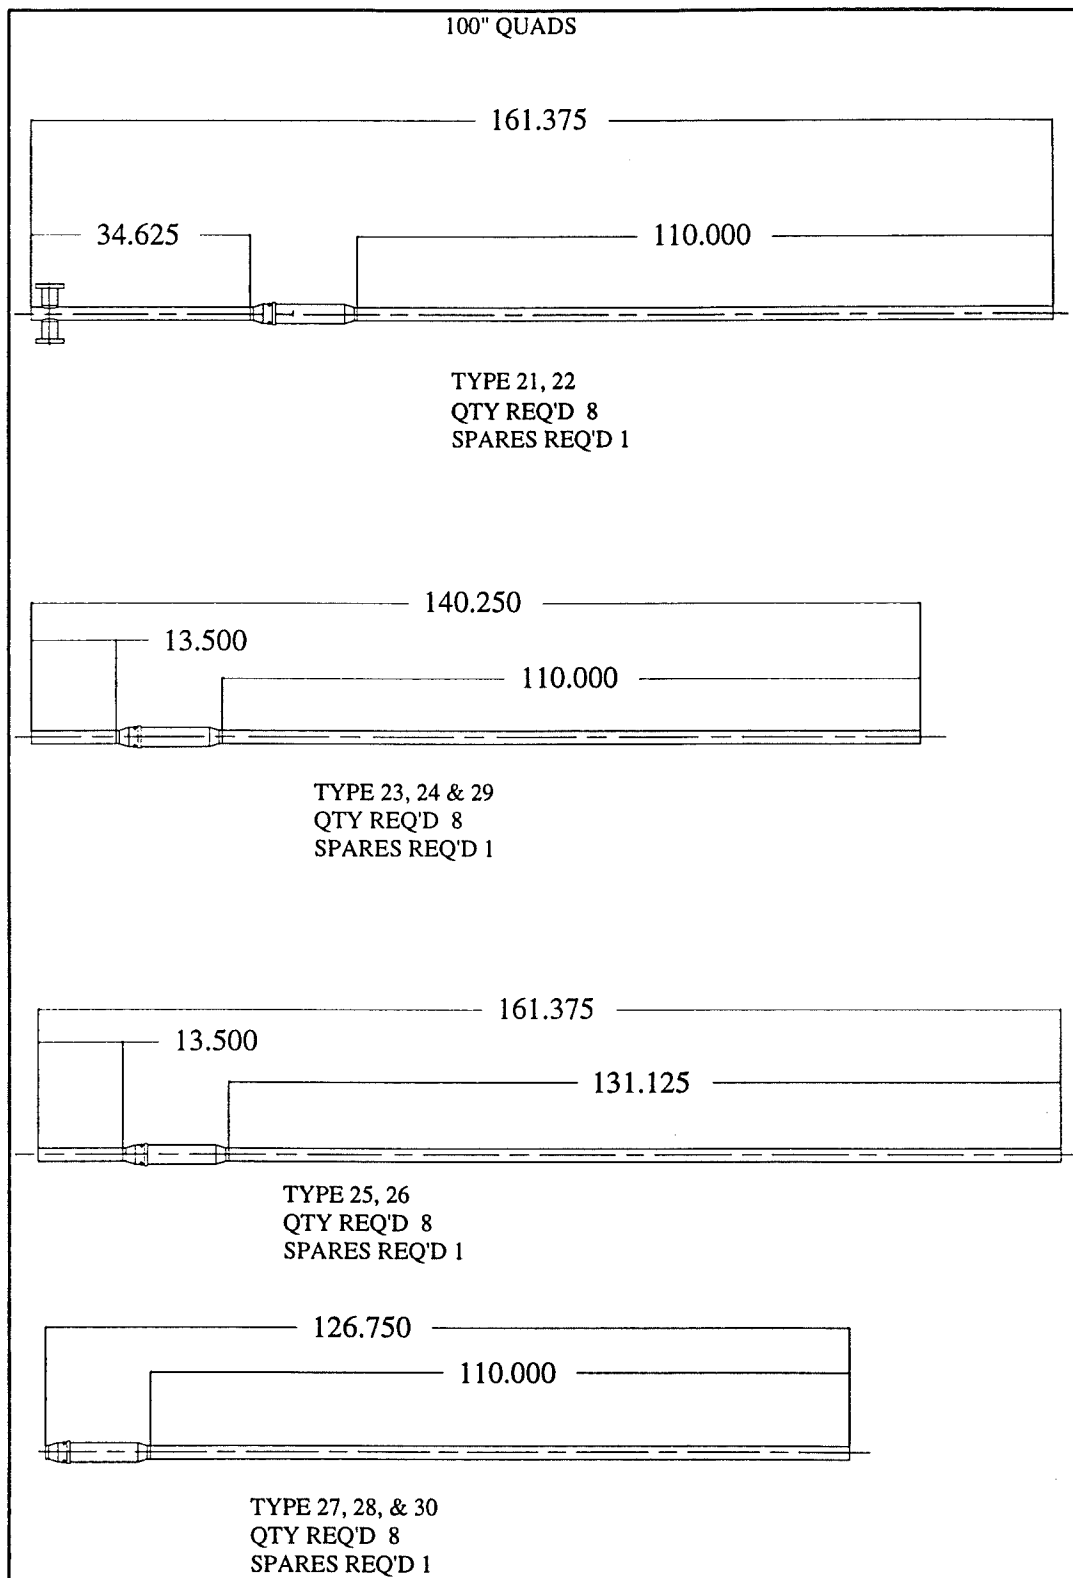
Quadrupole Beam Pipe Assembly (cont.).
